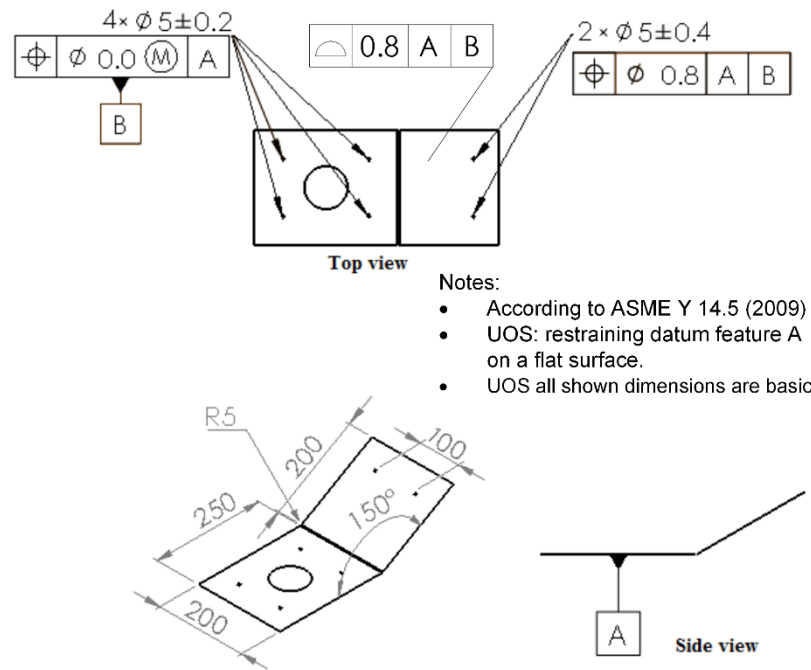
GD&T specification for part A (dimensions are in mm).
